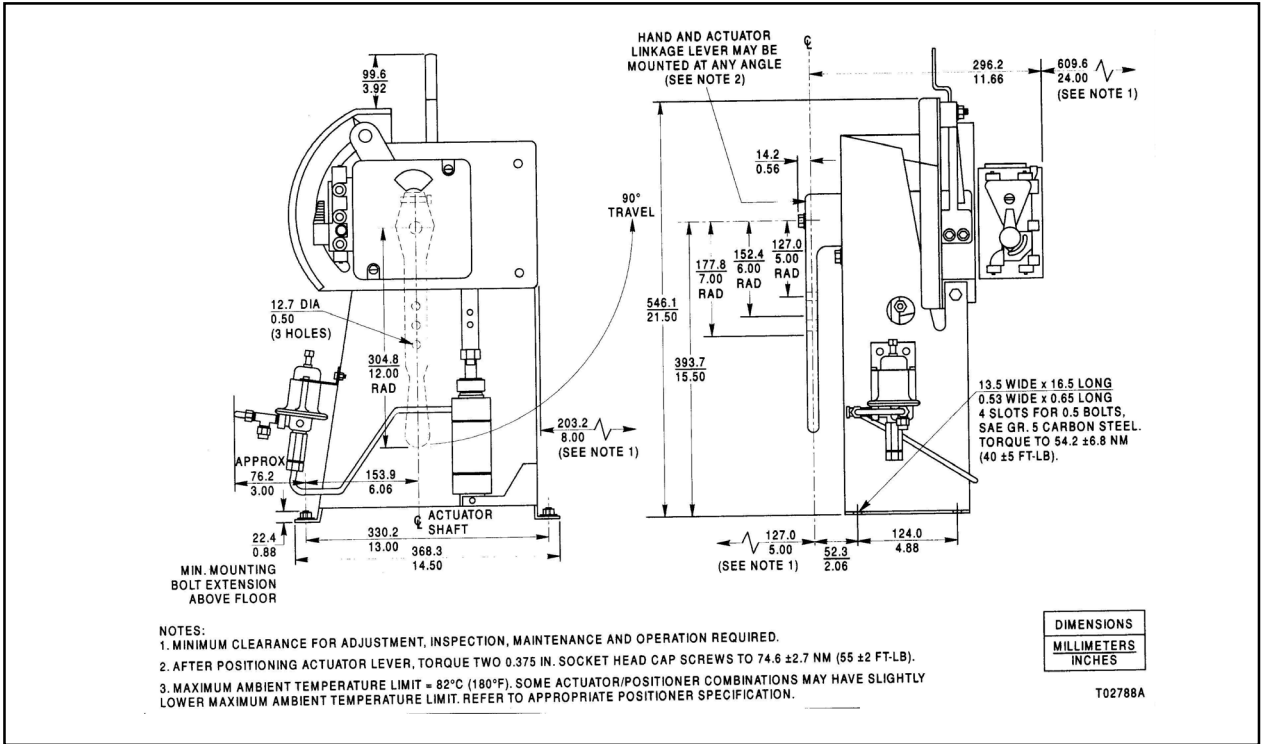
Type UP1 Actuator with Positioner and Air Failure Lock
